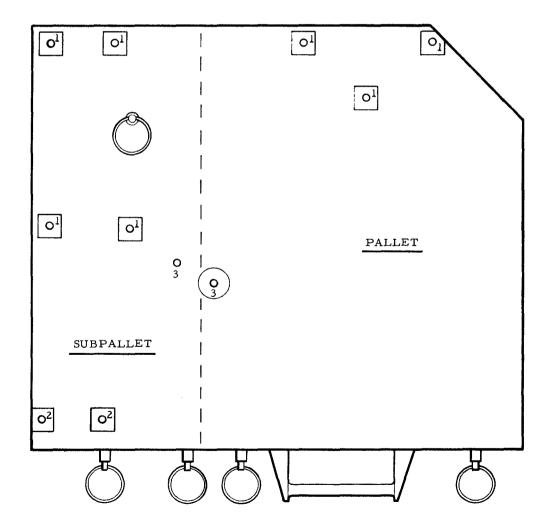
Boyd Bolt Locations, Subpackage No. 2
